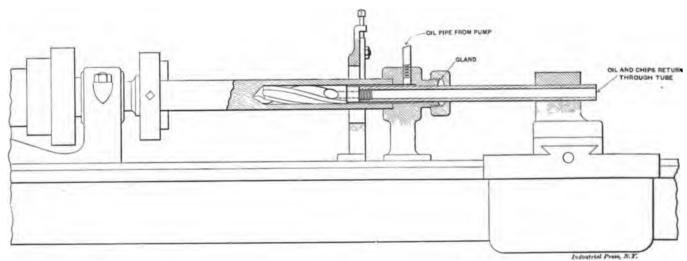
Method Recommended by the Morse Twist Drill Co. for Using the Hollow Drill.
